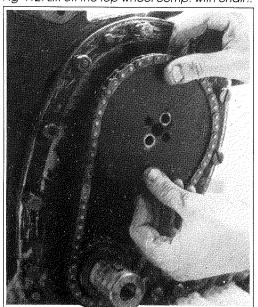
Discard the old chain and wrap the prise out the old oil seal.
